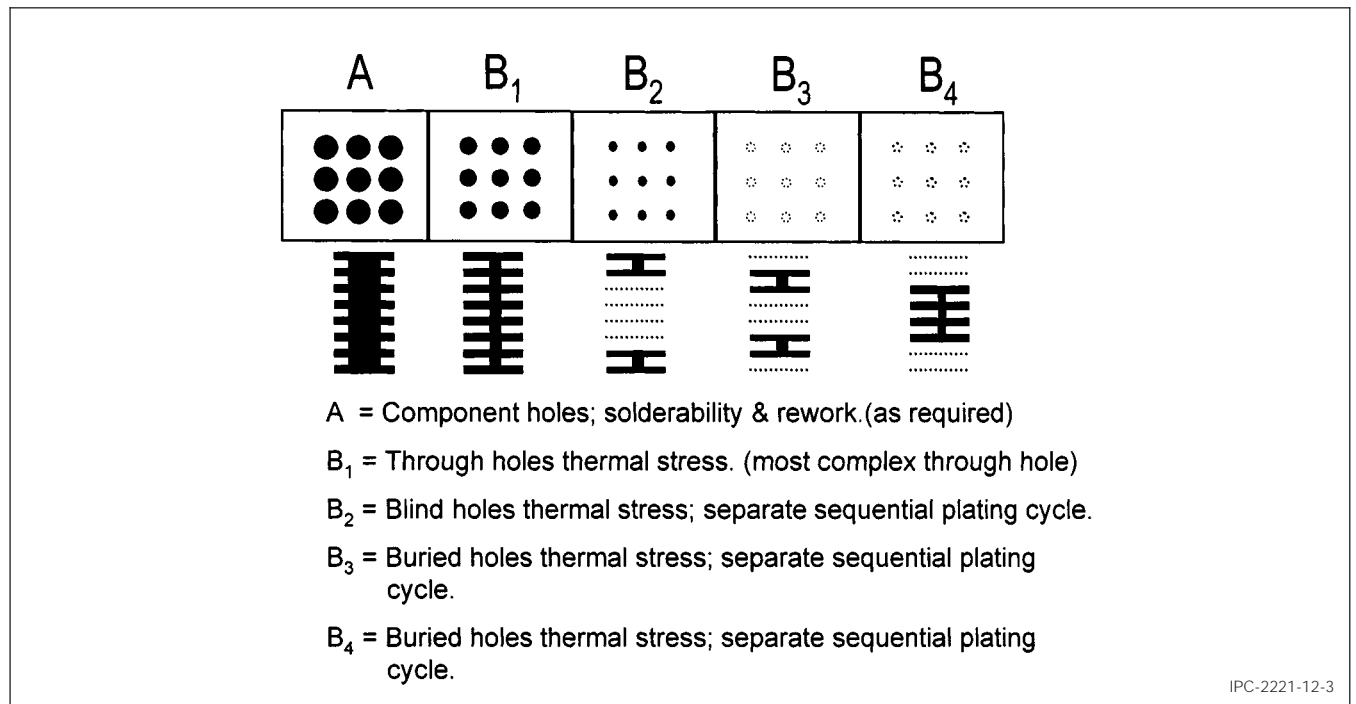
Test Specimen A and B (example of multiple coupon use for an IPC-6012 Type 4 PWB design)
